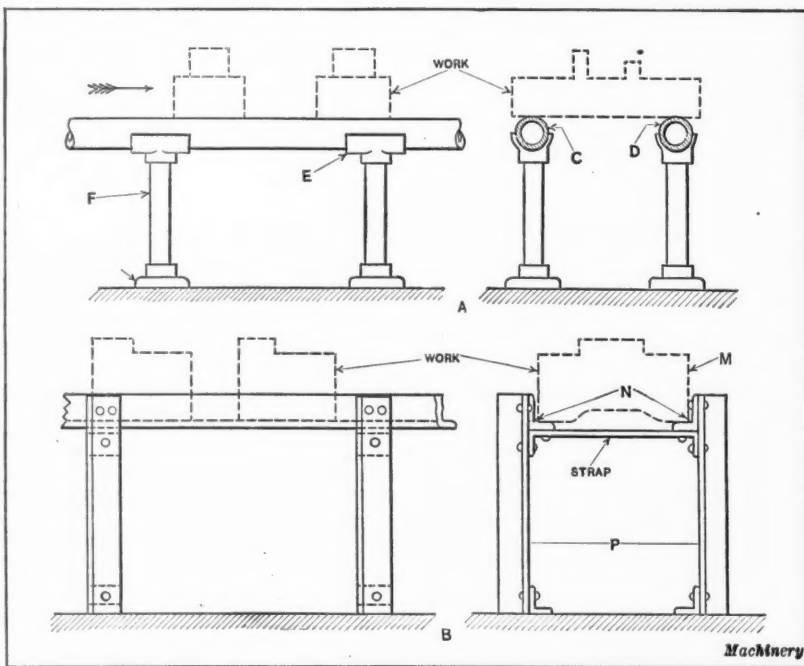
Two Simple Designs for a Plain Assembling Conveyor
